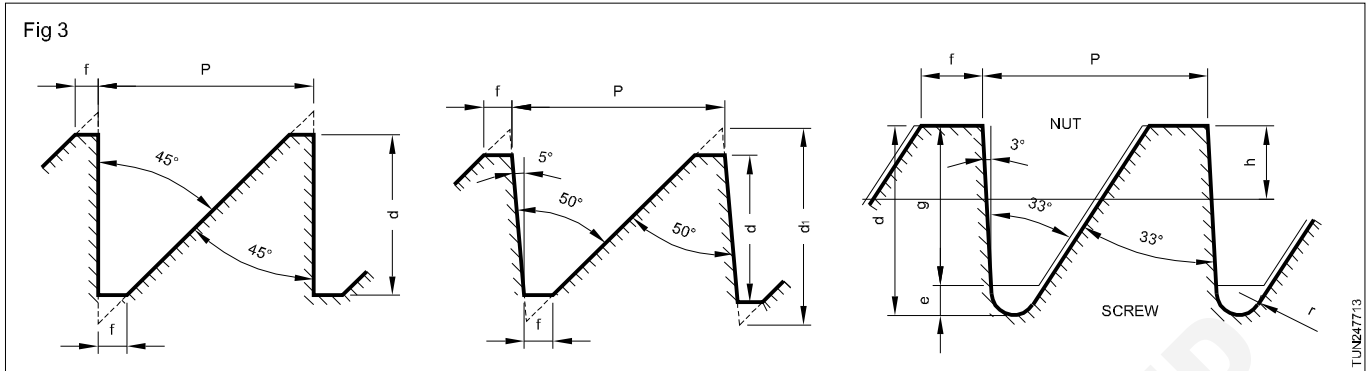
shows a common form. The front or load-resisting face is perpendicular to the axis of the screw and the thread angle is 45 degrees. According to one rule, the pitch $P=2 \times$ screw diameter $\div 15$. The thread depth d may equal $3/4 \times$ pitch, making the flat $f=1/8 \times$ pitch. Sometimes depth d is reduced to $2/3 \times$ pitch, making $f=1/6 \times$ pitch.
